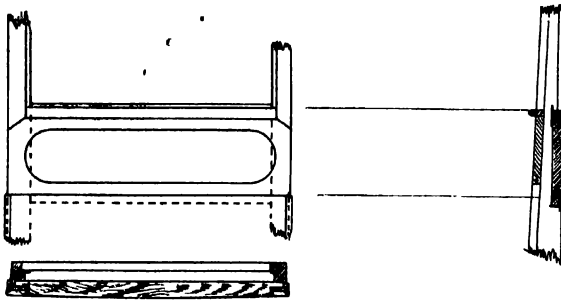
A Further Step towards Modern Practice in Waist Rail Construction.
